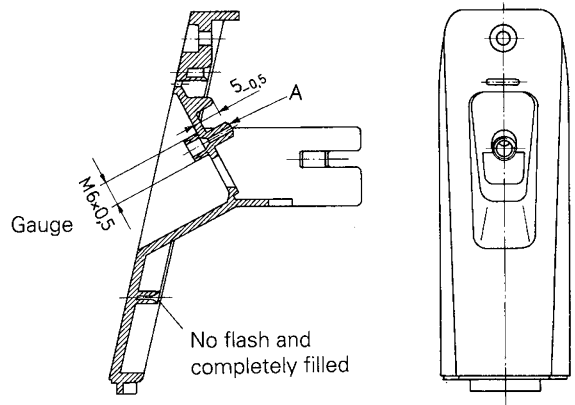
Inspection diagram for the reservoir insert; bore holes and openings without flashes, no sink marks, voids, scratches or flow marks on visual faces; part must fit into the frontal reservoir opening
